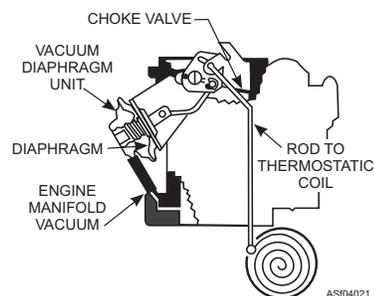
Automatic choke with thermostatic coil mounted in manifold.
